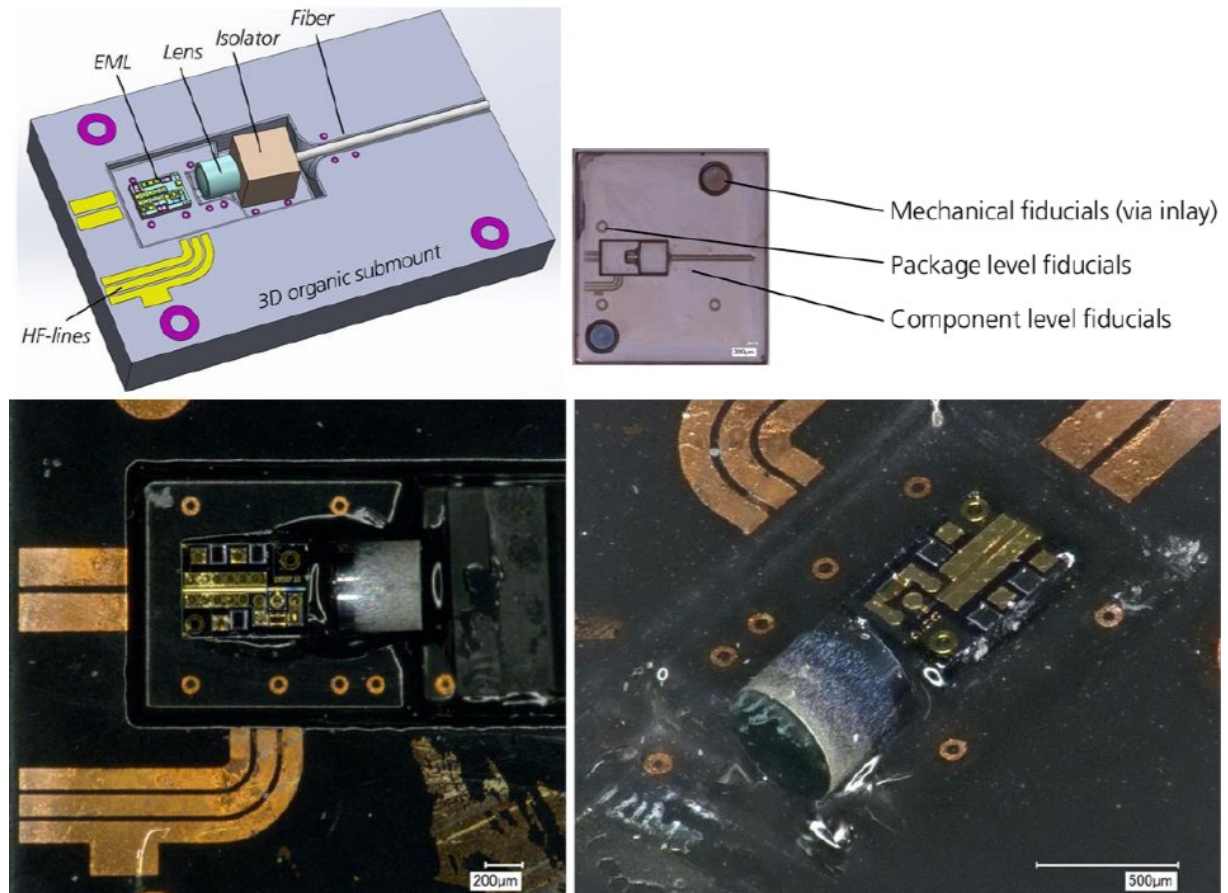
Package Sketch UC3 based on 3D organic submount and test assembly at BESI-AT
